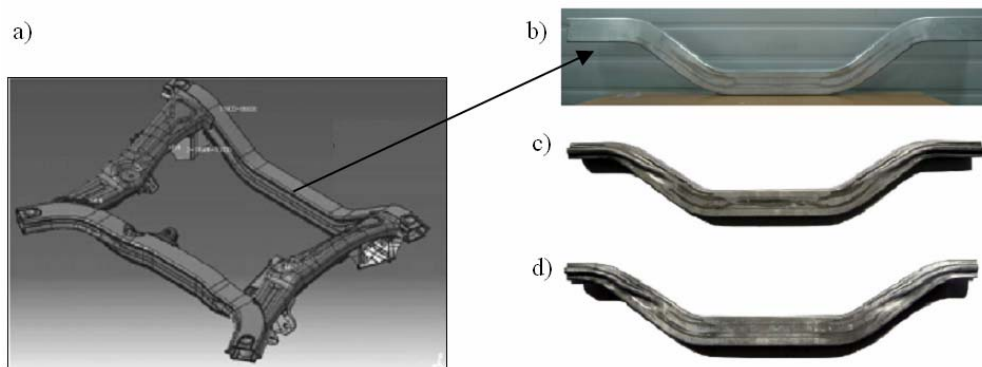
Part of the subframe (a), photographs of forming of the extruded profile: bending (b), pressing (c), hydroforming (d) [21]
